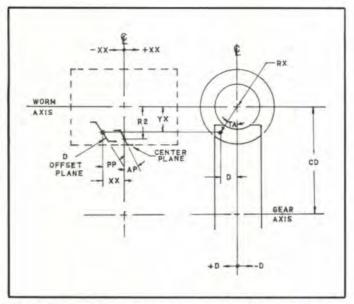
Diagram of geometry and dimensions on the worm and gear.
